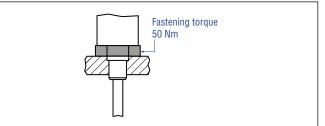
Mounting example of threaded flange »M« / »S« or pressure rod HD / HL / HP
